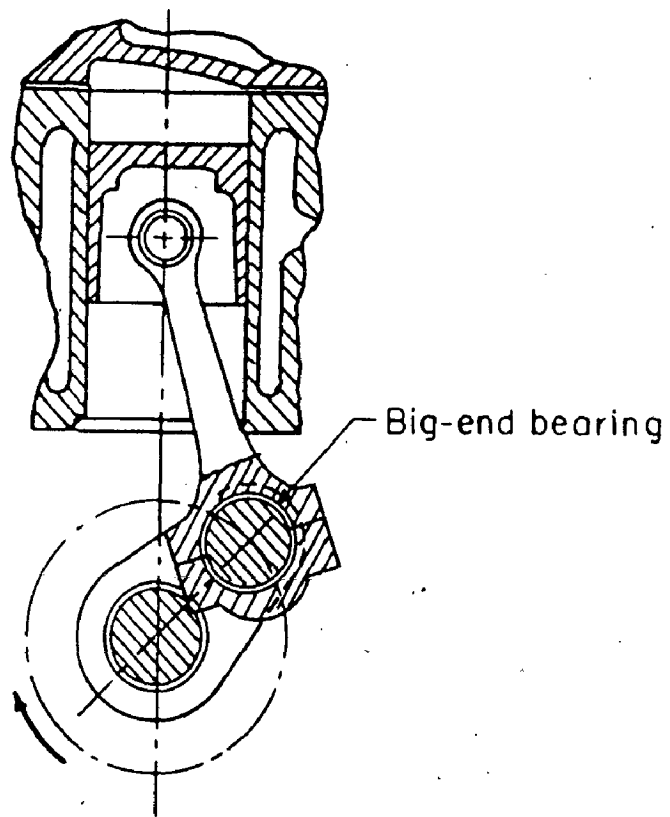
Sectional view of a connecting-rod and piston assembly
